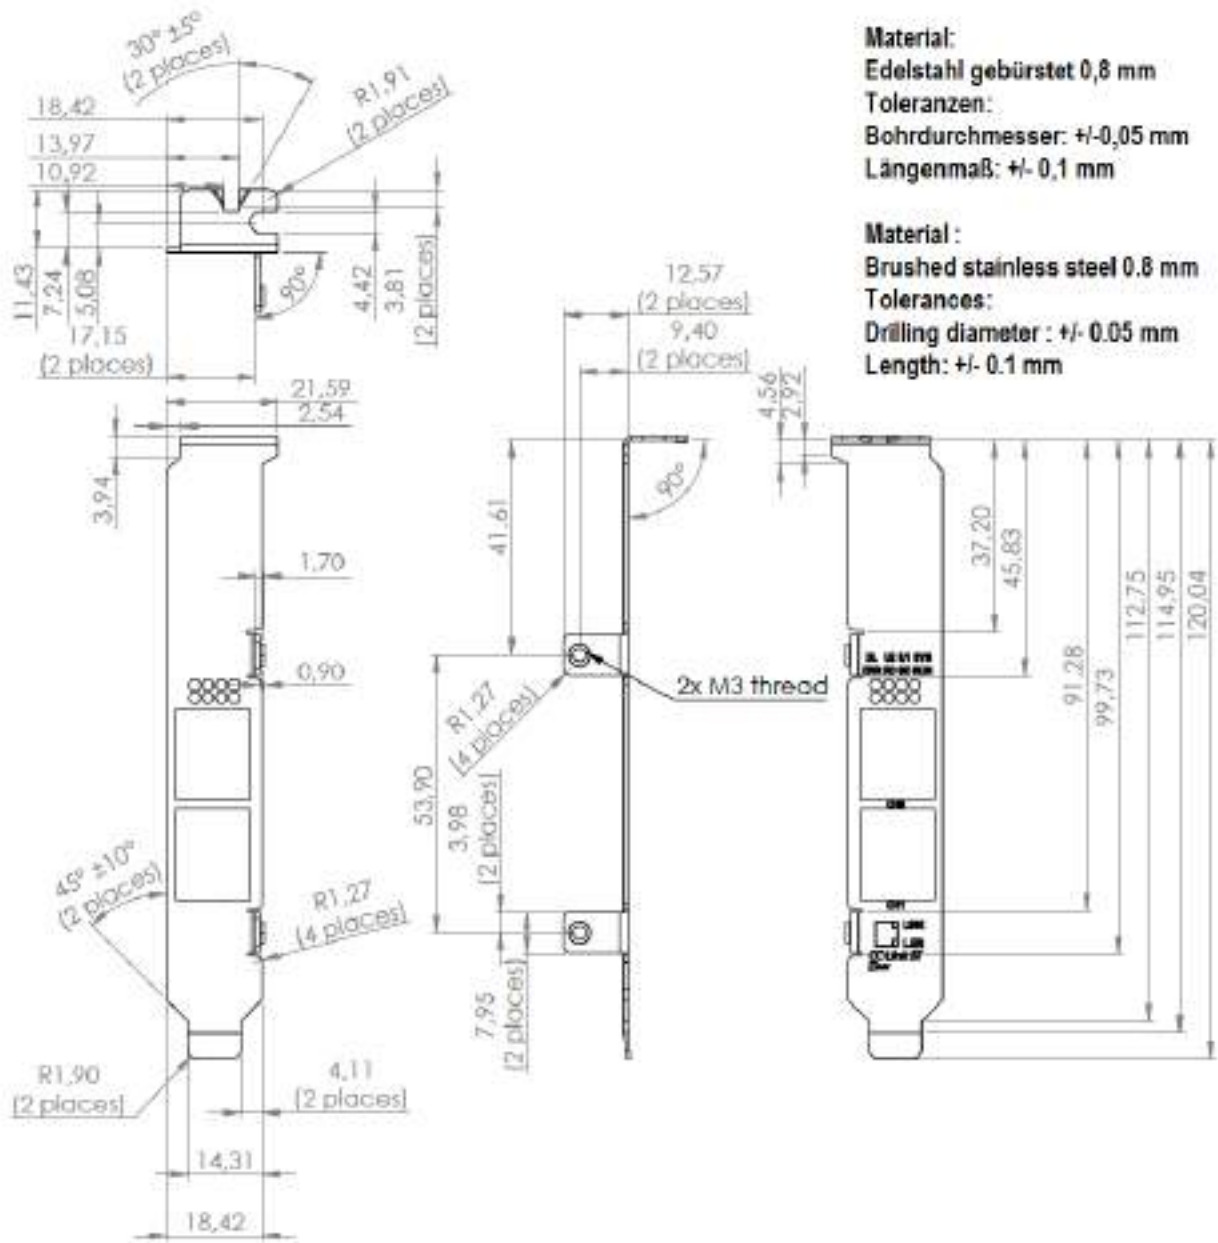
Dimensions Front Panel CIFX 50E-CCIES
